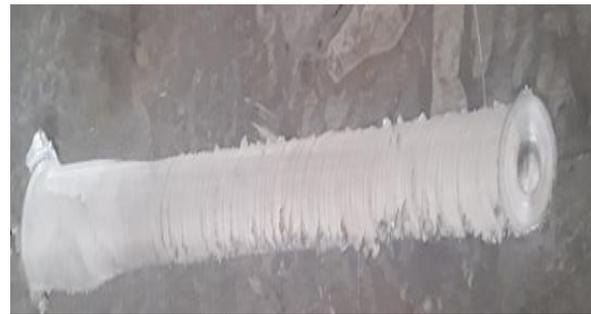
Visual inspection of Low axle speed with high welding speed Weldment
